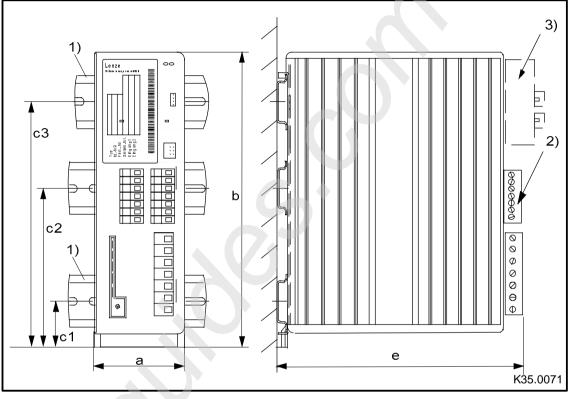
Dimensions 8201 - 8204: DIN-rail assembly 1)
